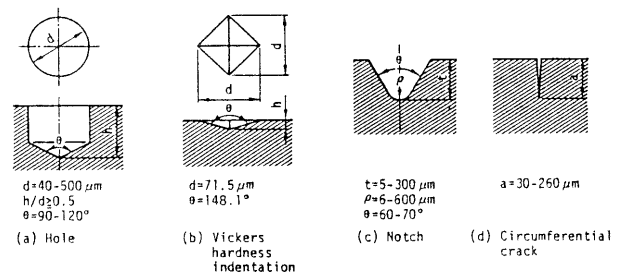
The shapes of defects and cracks investigated in ref. 2
